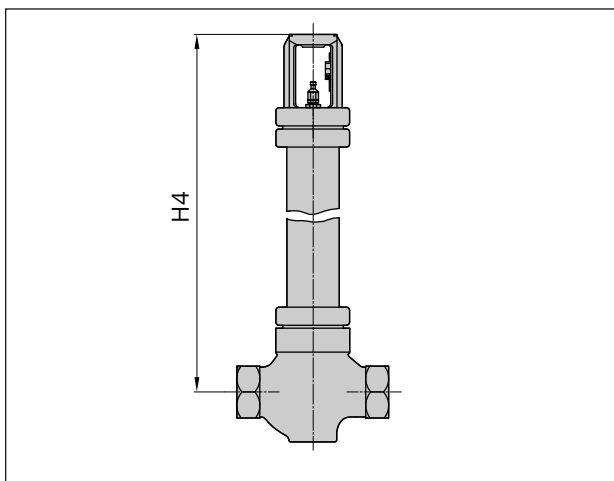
Type 3241 with insulating section or bellows seal and ½ to 2 NPT threaded connections
